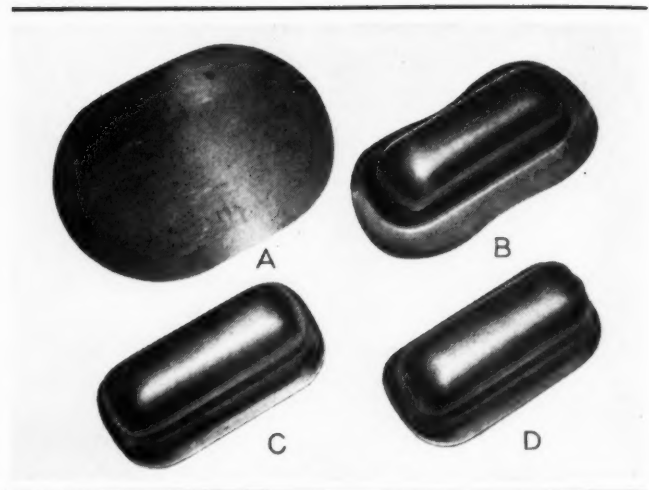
(A) Blank; (B) Formed Shell; (C) Trimmed Shell; (D) Completed Lamp Shade with Ends Raised, Flattened, and Pierced
